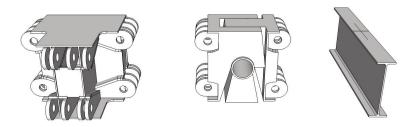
Overview of auxiliary components for the modular beam, from left to right: T-connector, link beam attachment, beam support
